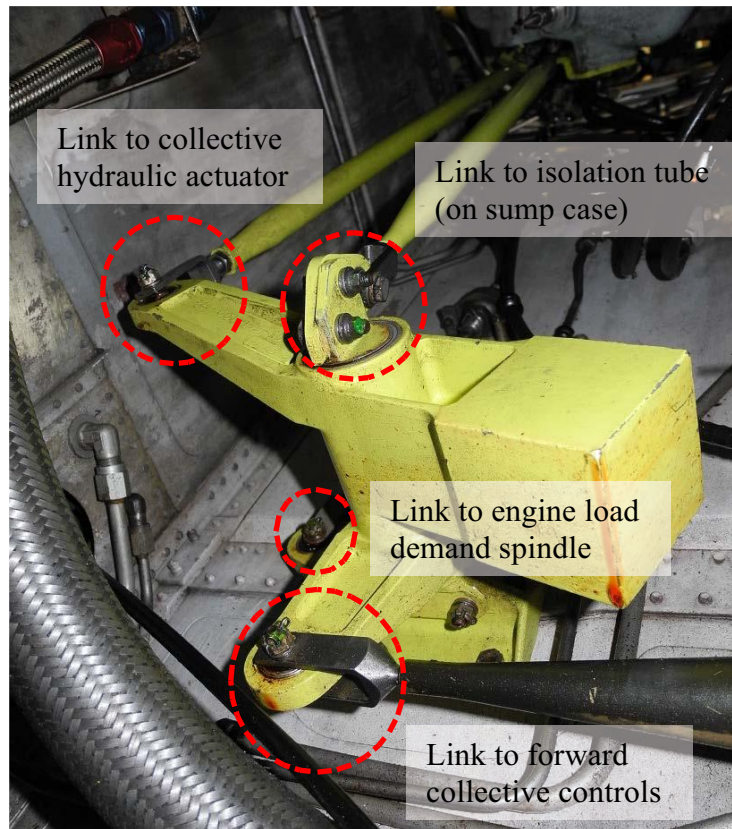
The four clevis connections on collective torque tube assembly (circled).
